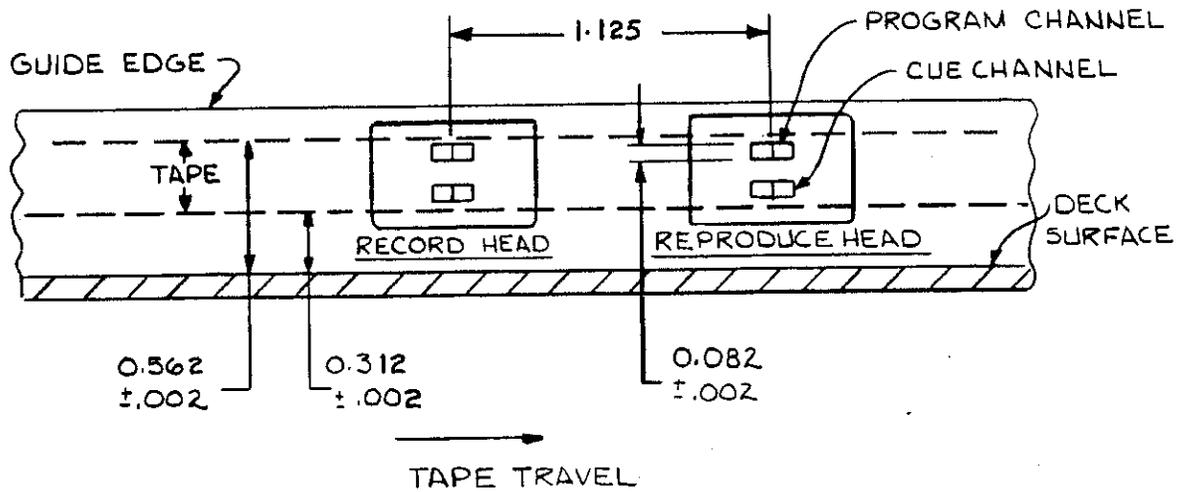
HEAD AND TAPE GUIDE ADJUSTMENT
